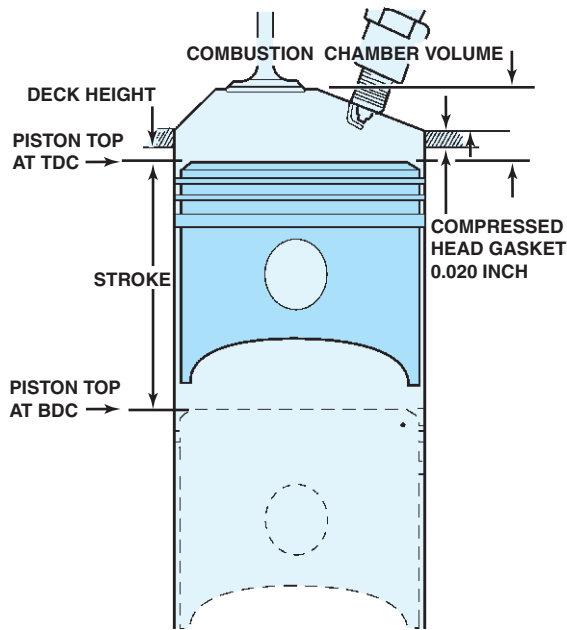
Combustion chamber volume is the volume above the piston with the piston at top dead center.
